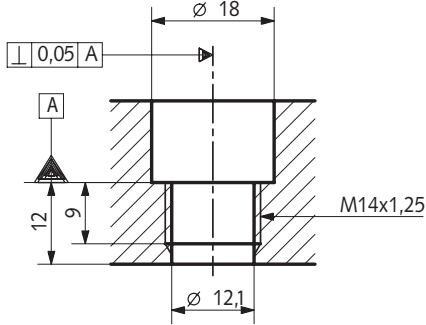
Fitted into combustion chamber with hole ø18 mm, seal Type 1111A, diaphragm flush mounted with the combustion chamber
